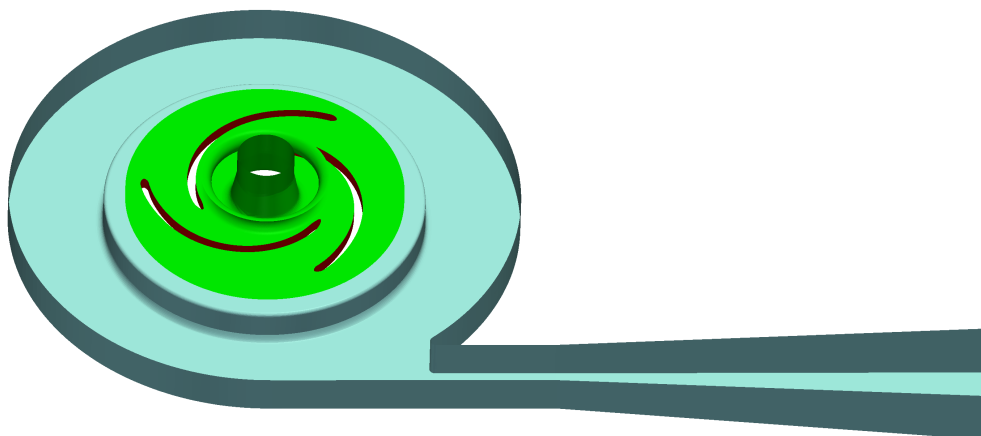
Position of the rotor in the outlet casing of the OTA-2 pump.
